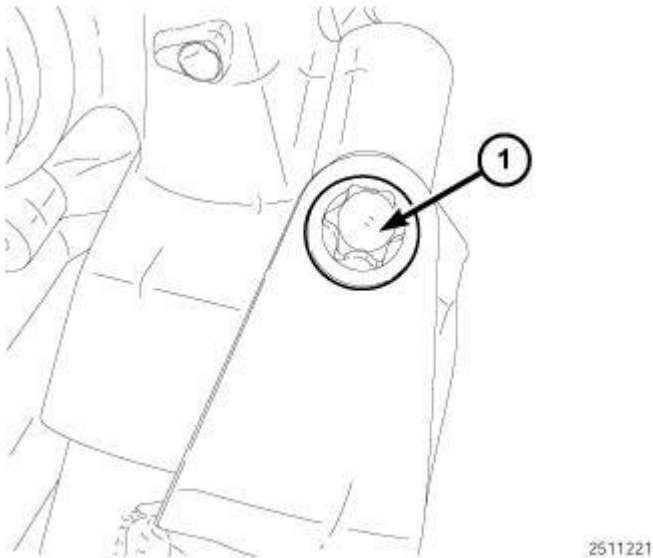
No. 1 Camshaft Bearing Caps & Bolts
